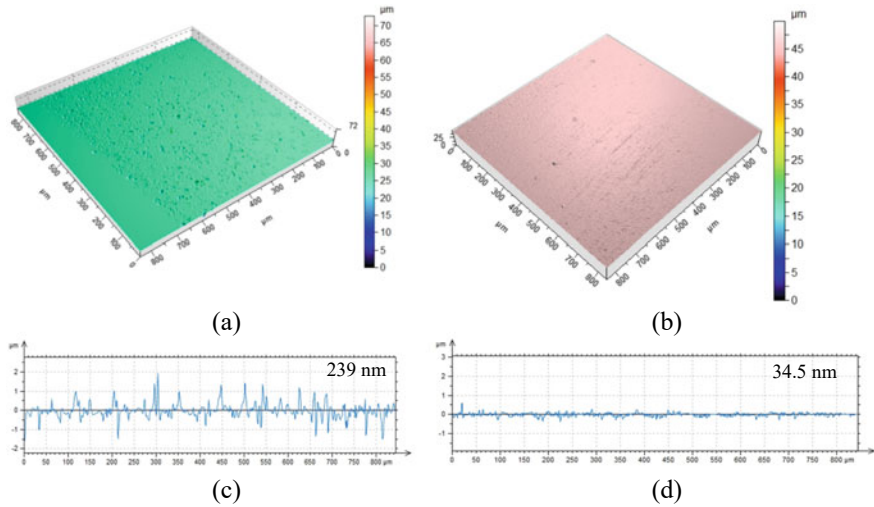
3D surface topography of gear involute profile a pre and b post finishing; surface roughness profile of gear involute profile c pre and d post finishing
